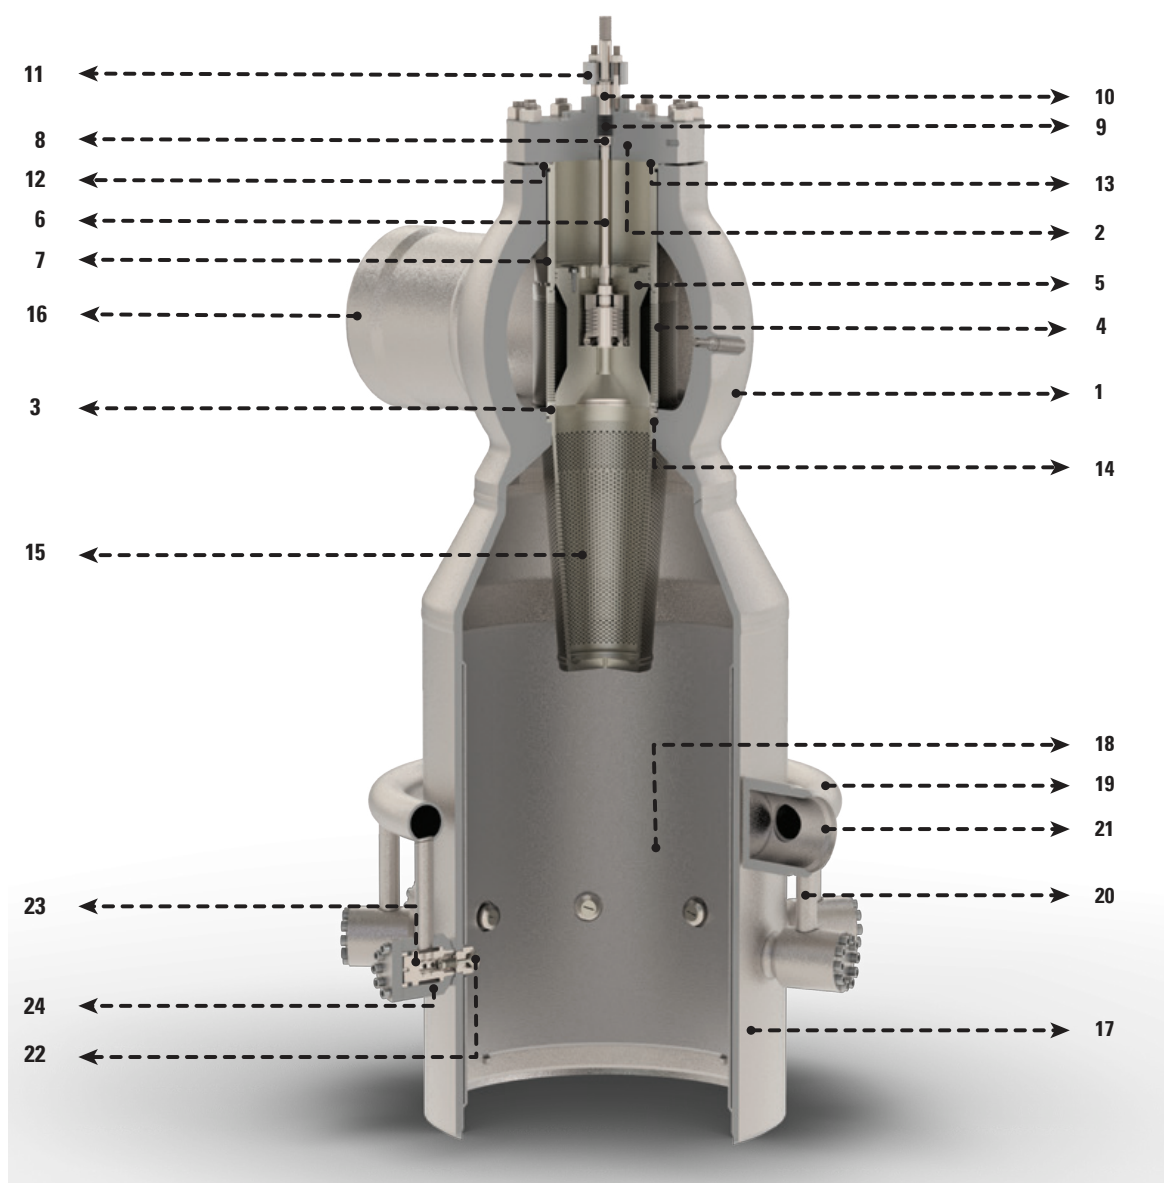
Cross-section of a steam pressure reducing valve with a 550A trim
